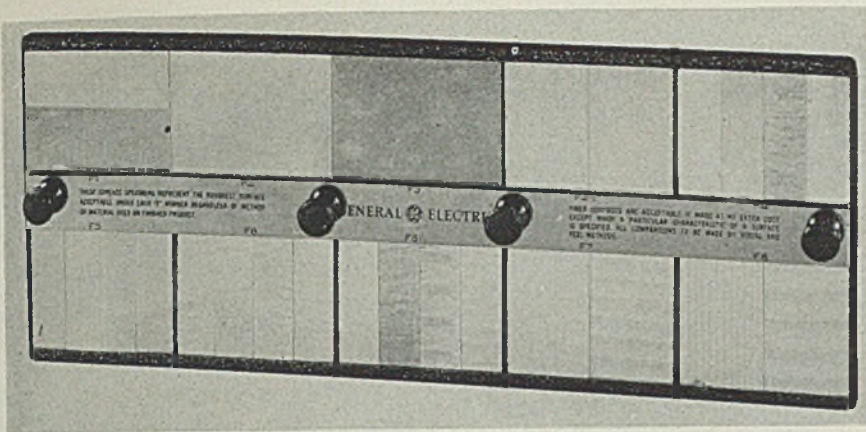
Machined-surface-finish specimens in panel for comparison checking of surface finishes
